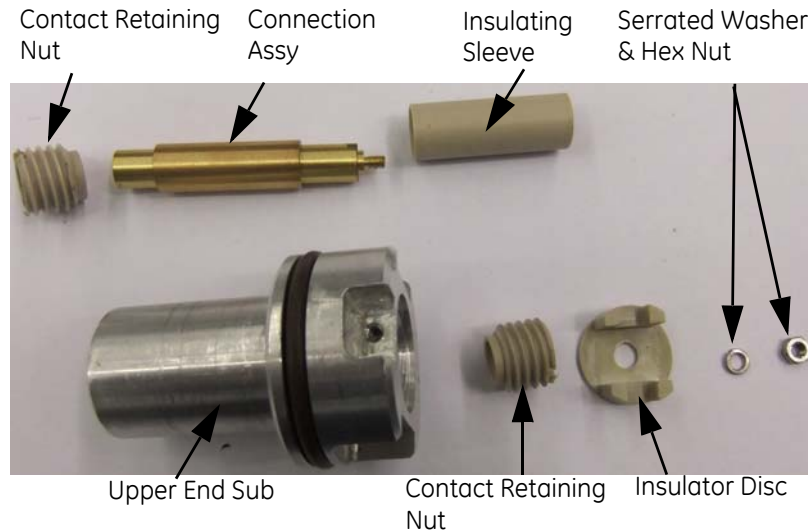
The Upper End Cap with Connector Assembly & Insulators
